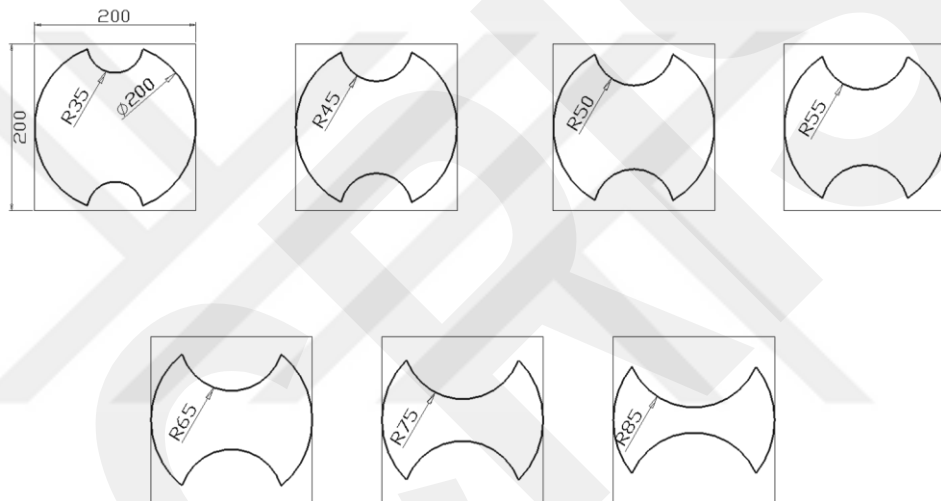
The 2D technical drawing of 7 different Nakajima specimens
